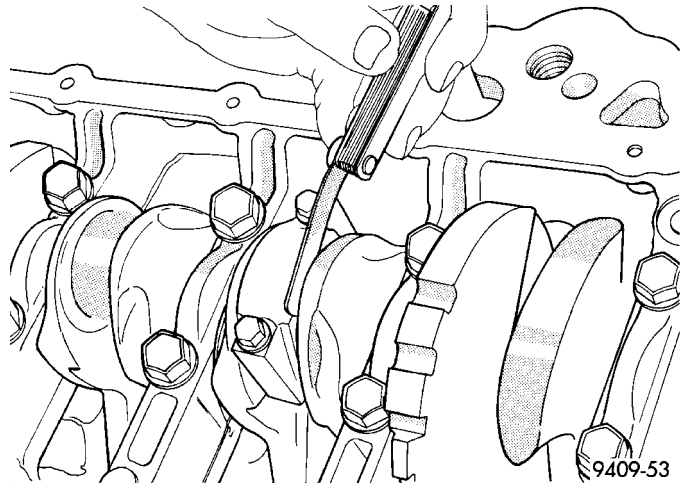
Checking Connecting Rod Side Clearance - Typical
